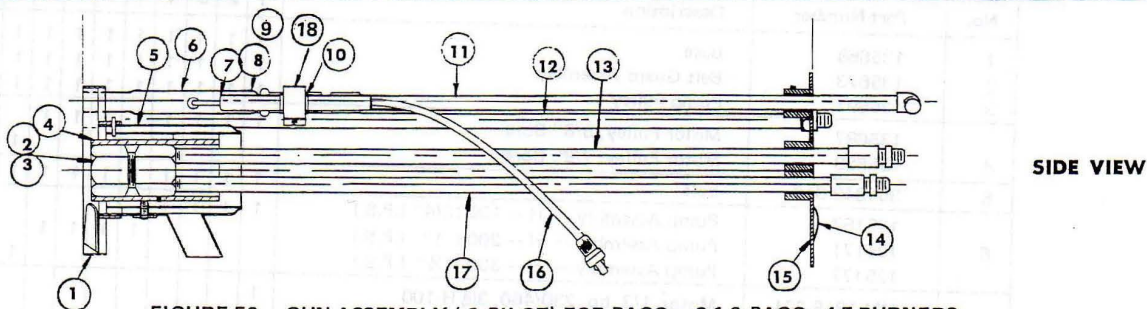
GUN ASSEMBLY (& PILOT) FOR PAGO – 2.1 & PAGO - 4.5 BURNERS
